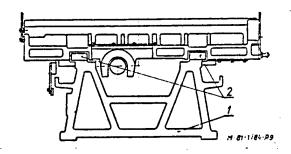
Cross-section of the bed of an HP4 machining center: 1-body, 2-guideways
